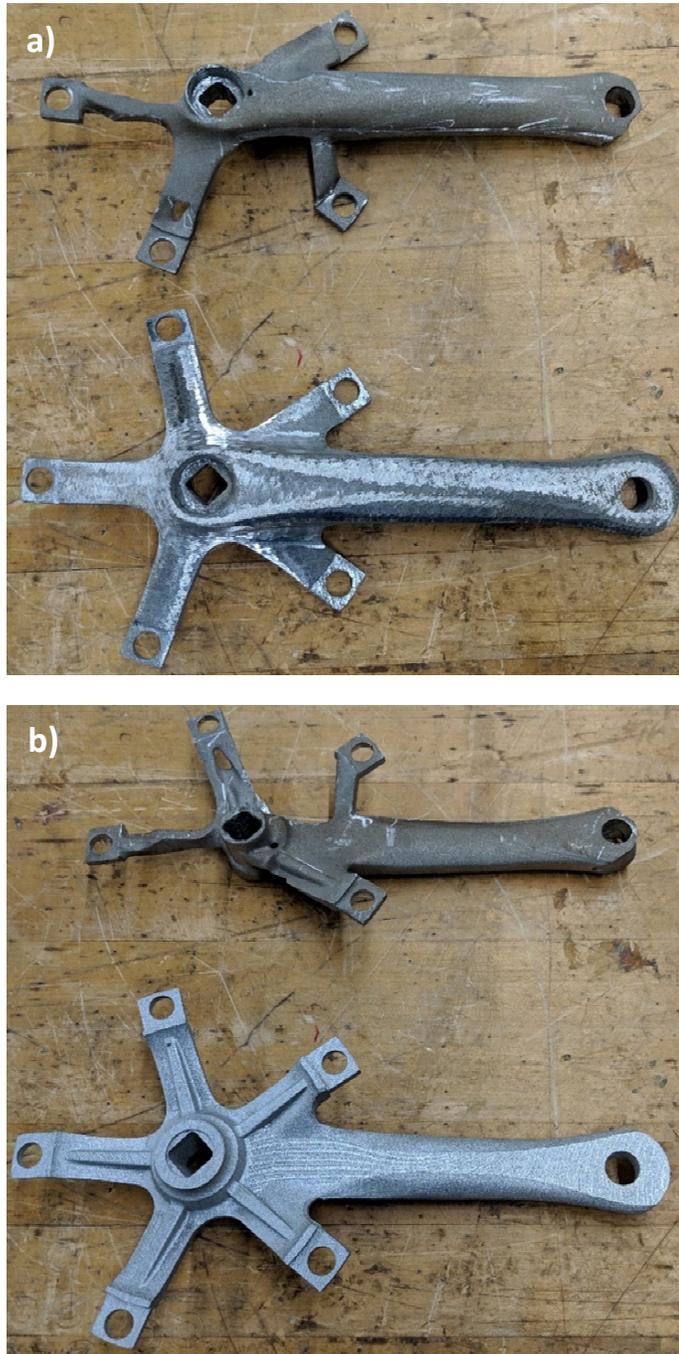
Front(a) and rear (b) view of the original design and the optimized design
